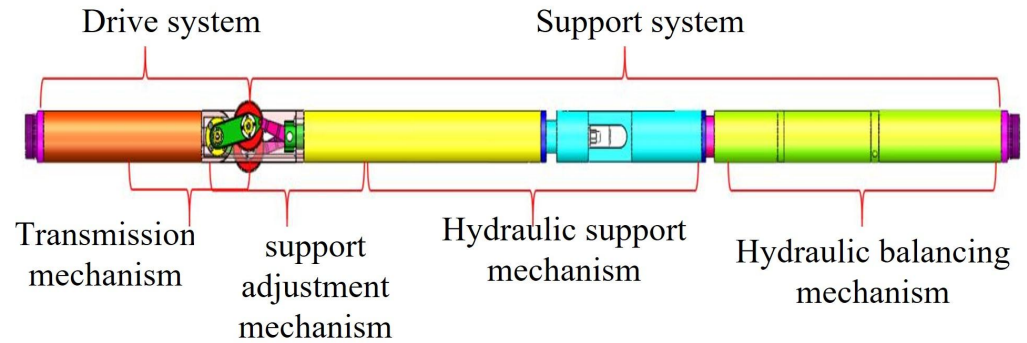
The overall structure model of the WDR with the push rod–spring support adjustment mechanism.
